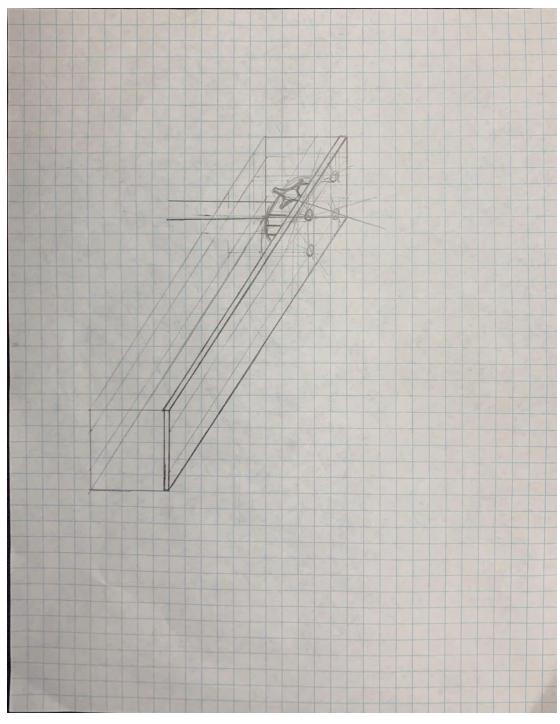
Image C. Isometric drawing of the Adjust-a-ball Armrest.
